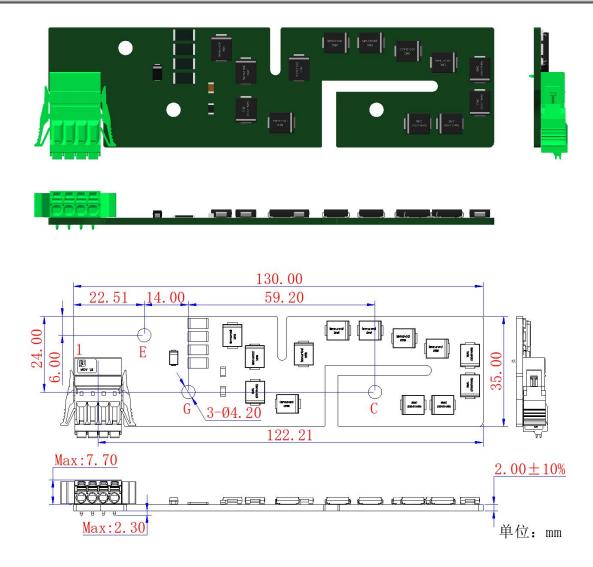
Mechanical dimensions of adaptor board(unit: mm)
